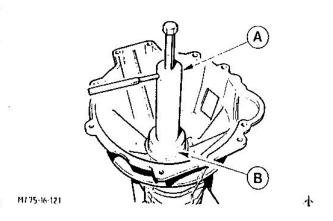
Pull off front transmission housing. A - Special Tool 16-041 B - Special Tool 16-041-01
